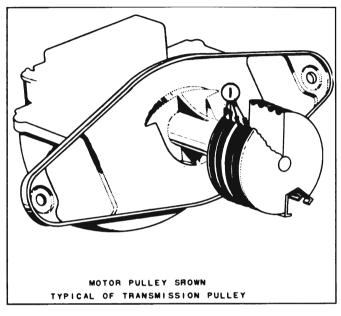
Lubrication of Windshield Wiper Motor Auxiliary Drive and Wiper Transmission Pulleys
